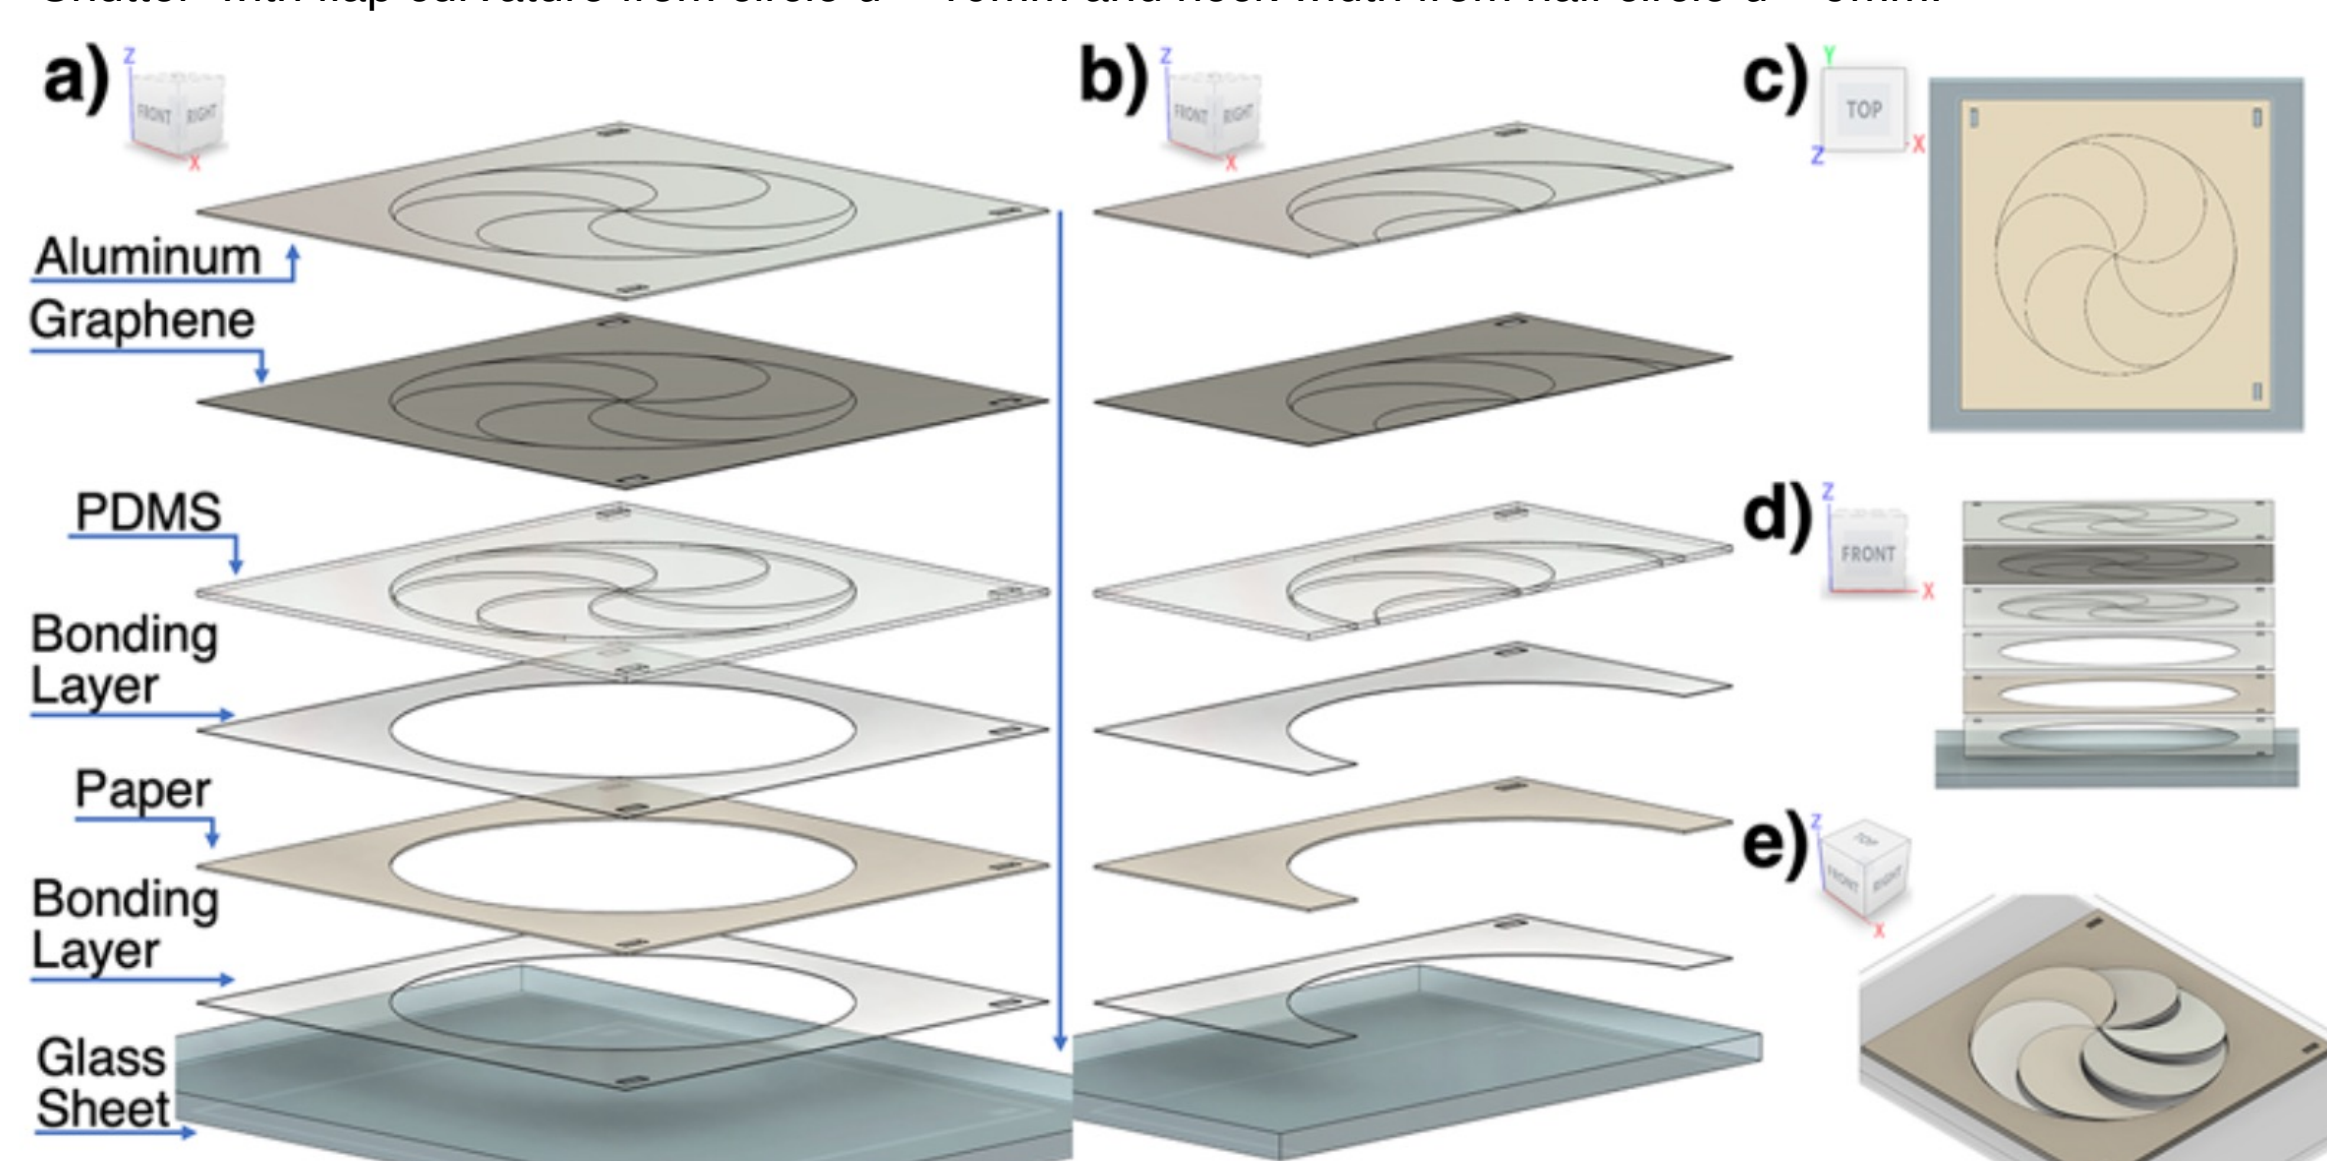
Layer assembly for Spiral Shutter. (a) Annotated orthogonal view of separate and closed layers. (b) Orthogonal view of cross-section, separate and closed layers. (c) Top view of layers. (d) Top-angled front view of separate and closed layers. (e) Orthogonal view of joined and opened layers.
